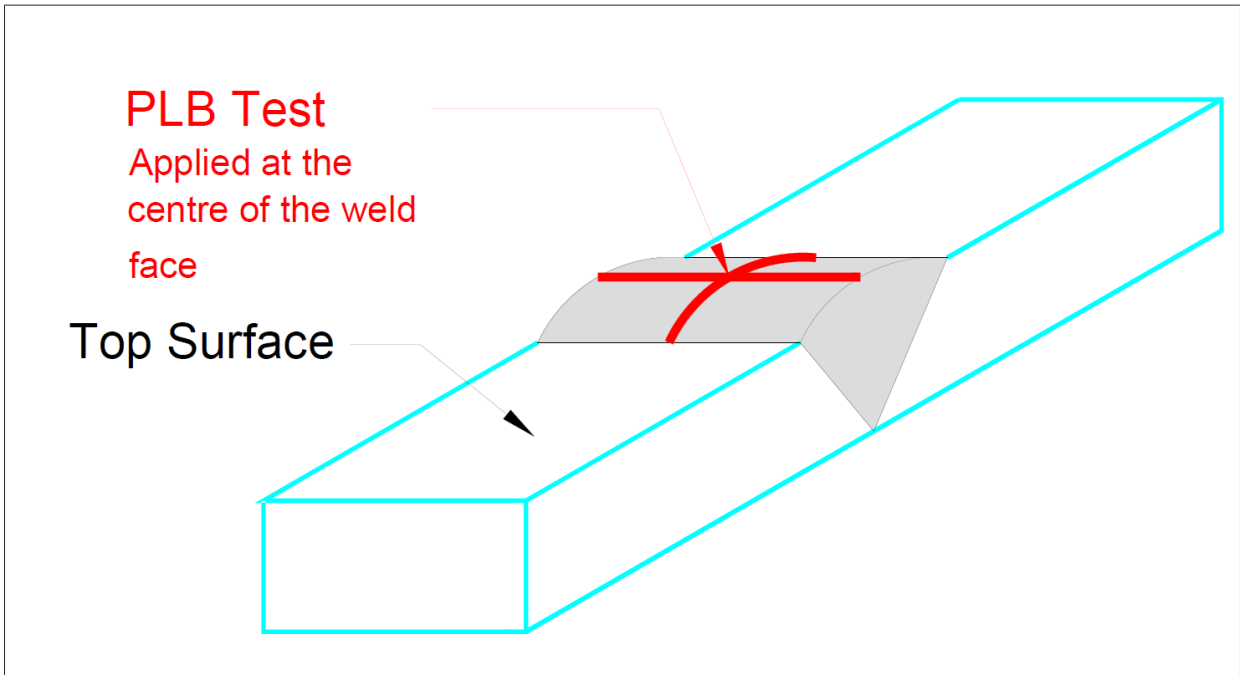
Pencil Break Lead test location on the welded specimen
